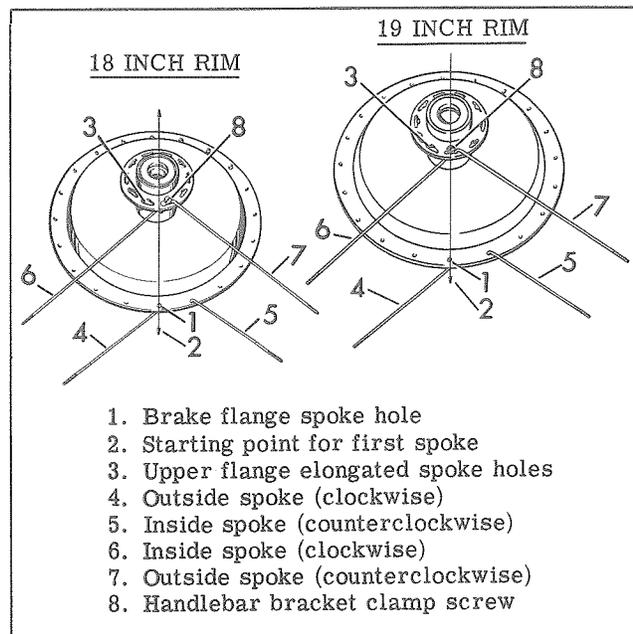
C-13. Inserting Spokes in Front Wheel (1963 And Earlier)
